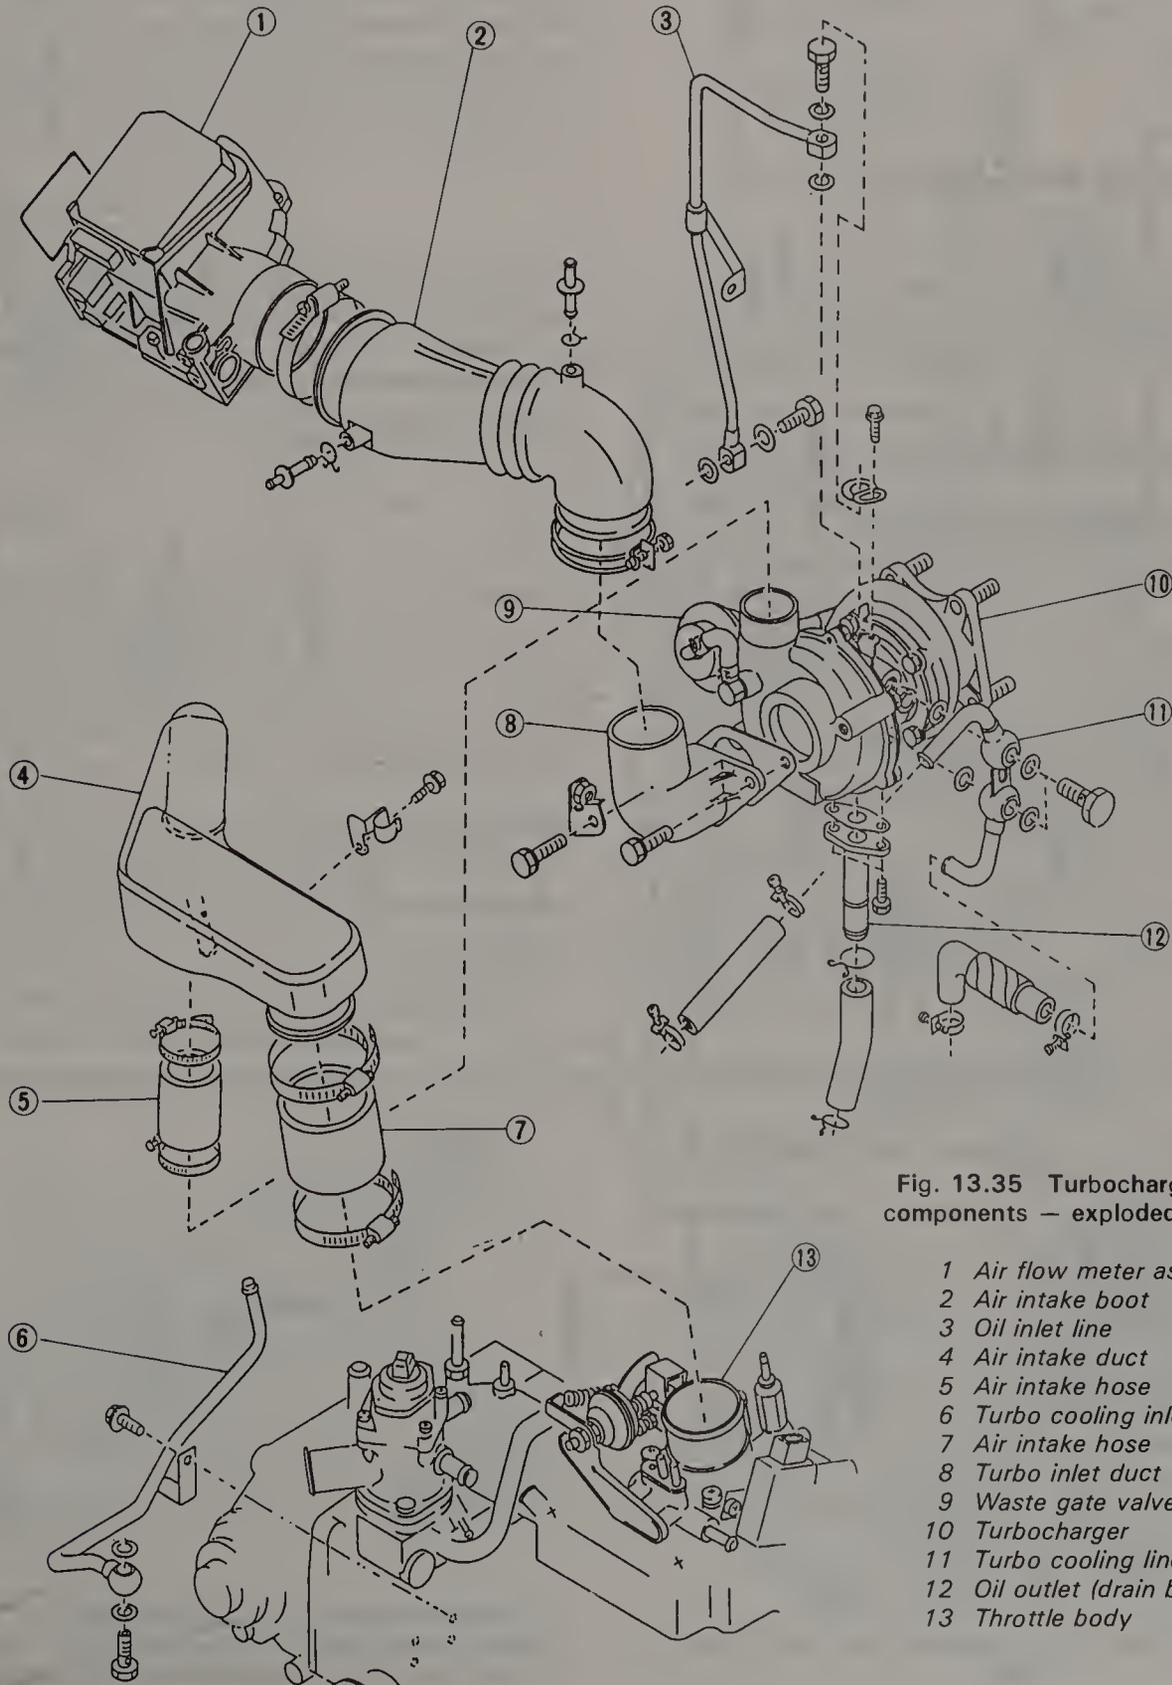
Turbocharger assembly components — exploded view (Sec 7)
